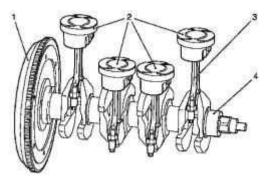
Crankshaft and Pistons: 1 - Handwheel, 2 - piston, 3 - connecting rod, 4 - Crankshaft
